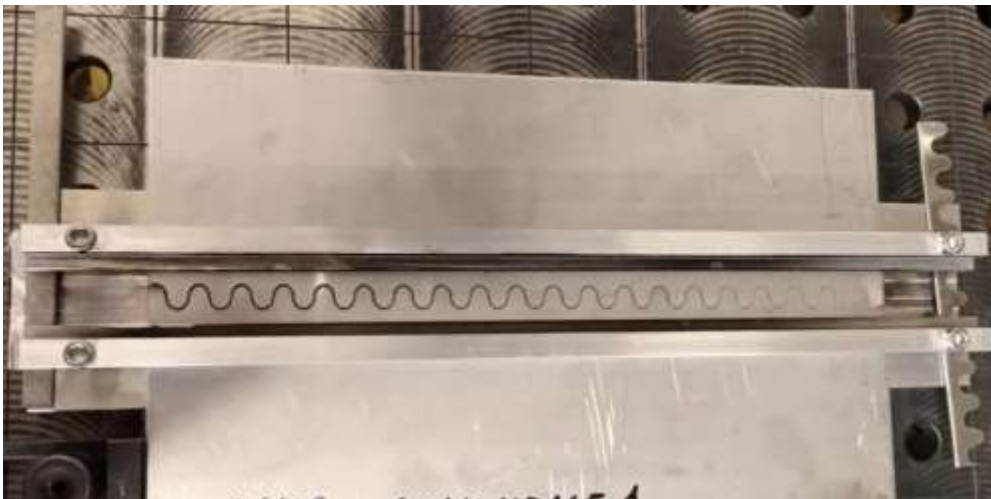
Clamping of the sheet for laser welding (sinusoidal interlocking pattern).
